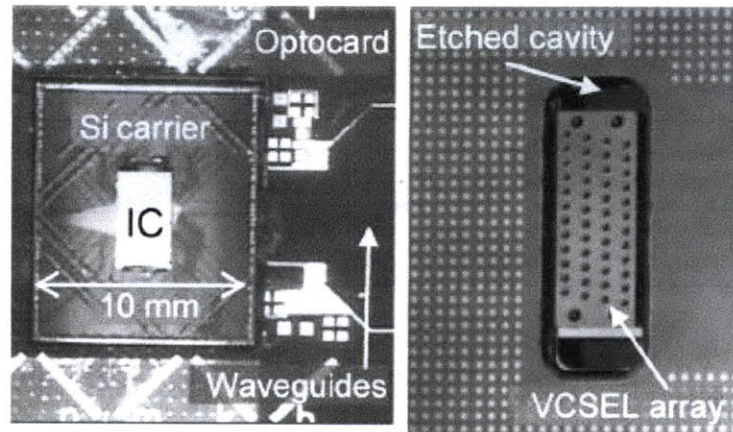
Entire Optochip-on-Optocard assembly (left) and bottom view of silicon carrier (right)
